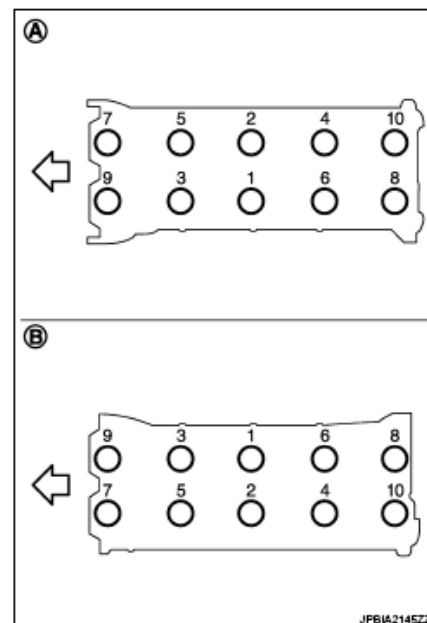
Identifying Cylinder Head Mounting Bolts Loosening Sequence
